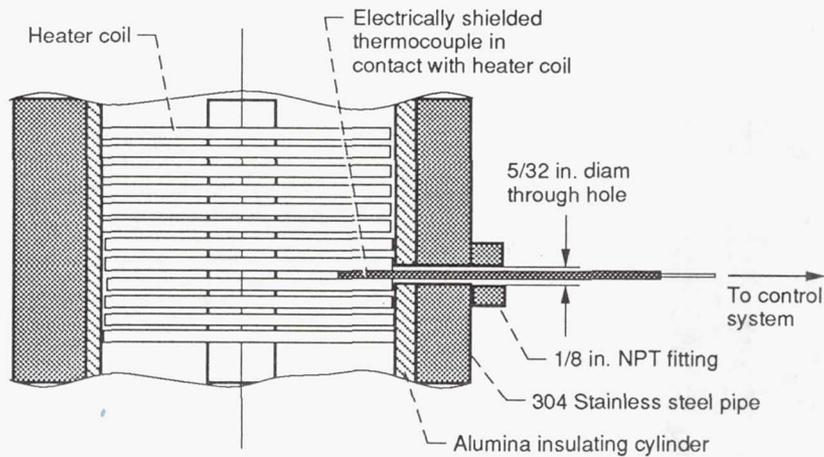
Air heater over-temperature sensing technique, enlarged for clarity.
